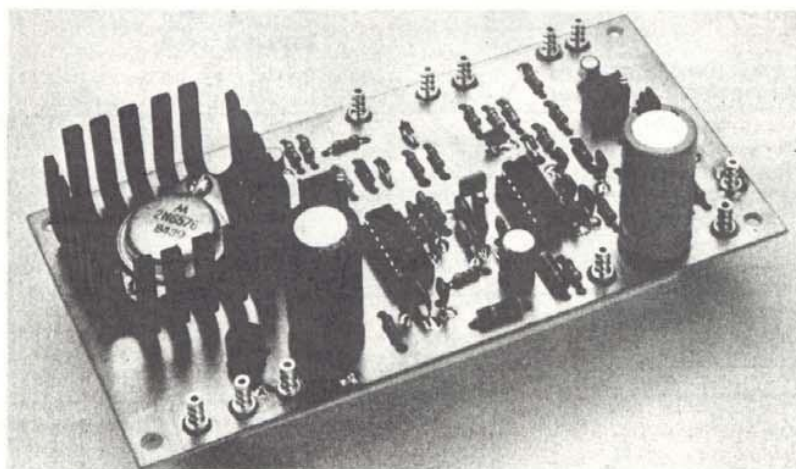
The regulator circuitry is mounted on a double-sided PC board. Component leads that connect to ground are soldered to the ground plane on top of the board. Copper foil is removed from the component side of the board where leads pass through to traces on the other side. See text and Fig. 10.
